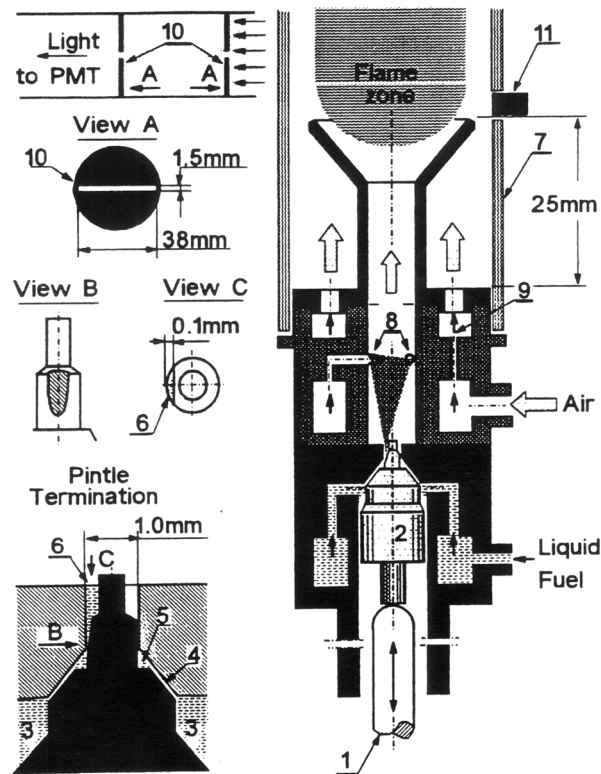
Fuel injector assembly and combustor setup¹⁸
